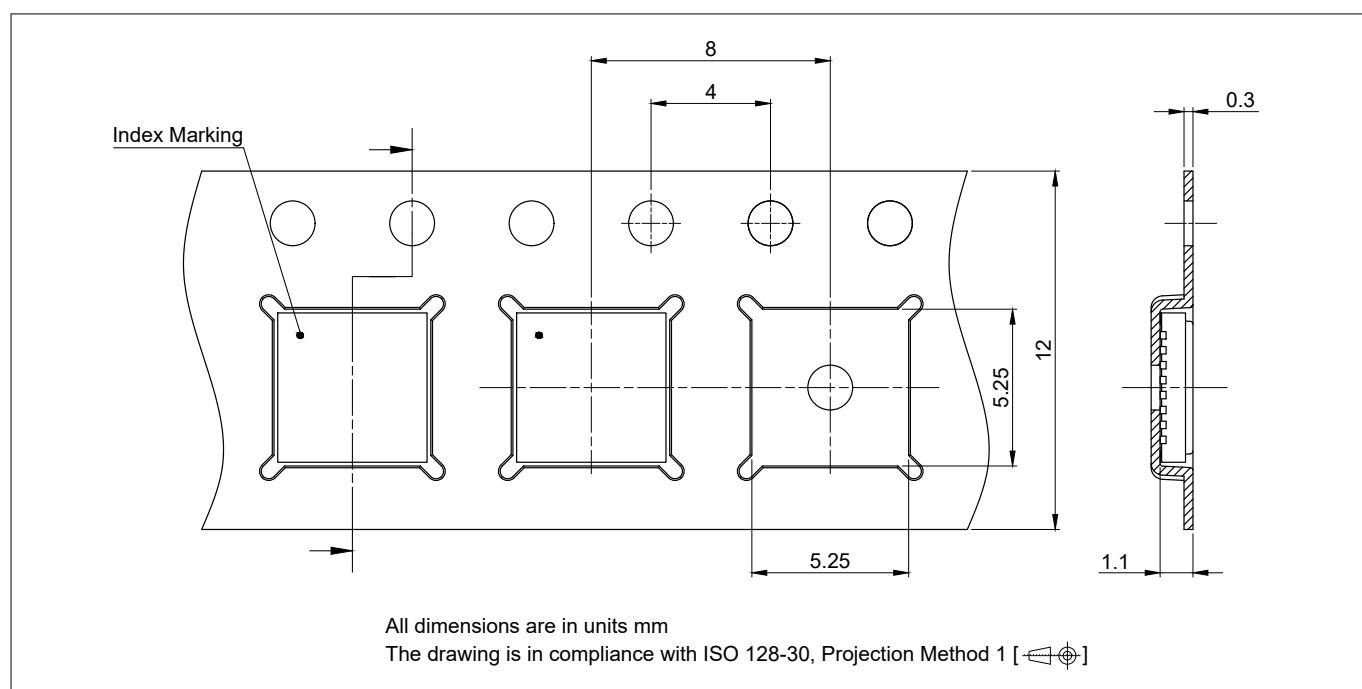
PG-VQFN-32-13, -20 tape & reel packing
